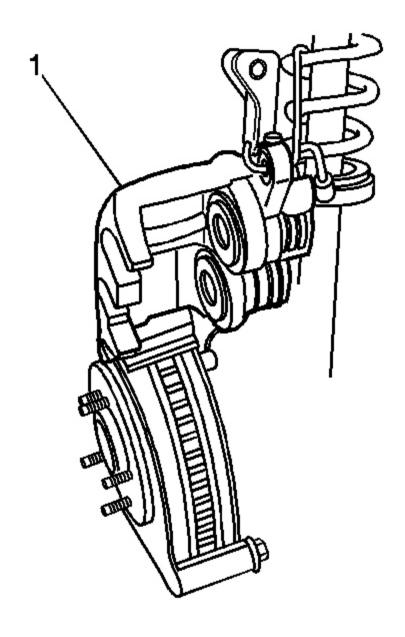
Supporting Brake Caliper With Heavy Mechanic's Wire Courtesy of GENERAL MOTORS CORP.
